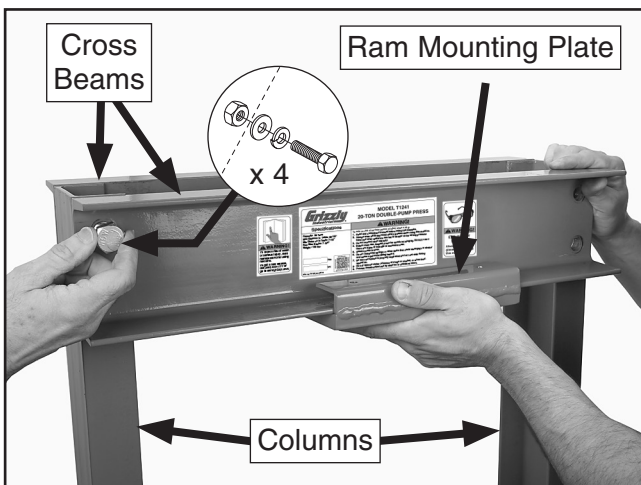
Securing cross beams to columns with ram mounting plate positioned on bottom edge.
